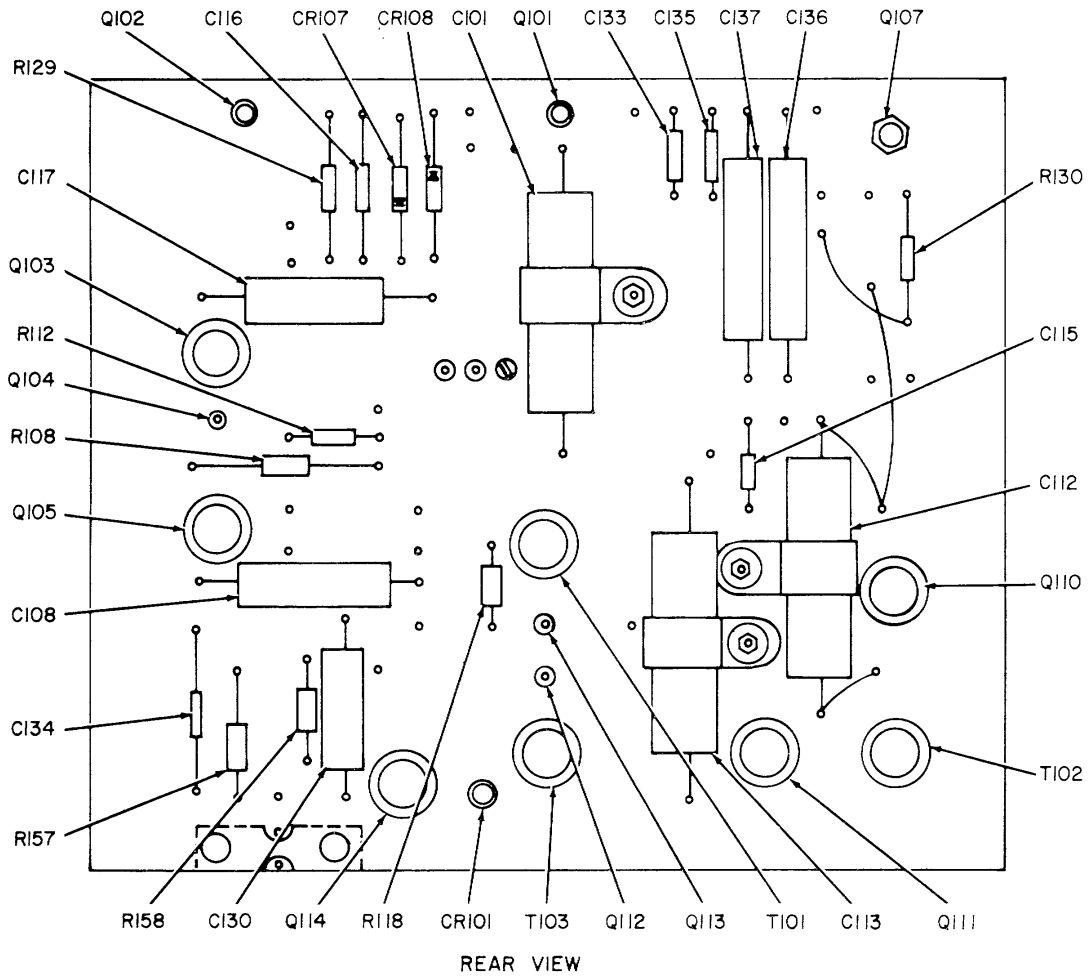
Test Set, Insulated Boot TS-1811/GSM-83, Terminal Board Assembly (Sheet 1 of 3).
